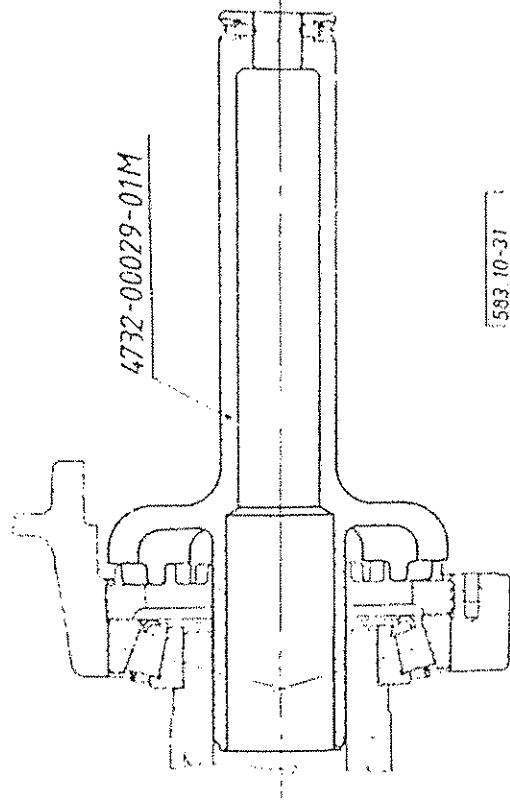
ASSEMBLING THE BEARING ADJUSTERS
